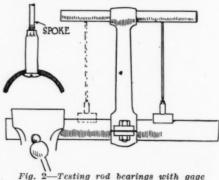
Testing rod bearings with gage made of spoke and short piece of brass tubing
